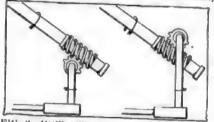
HOW ACTION OF STEERING GEAR MAY BE REVERSED BY LINKAGE
